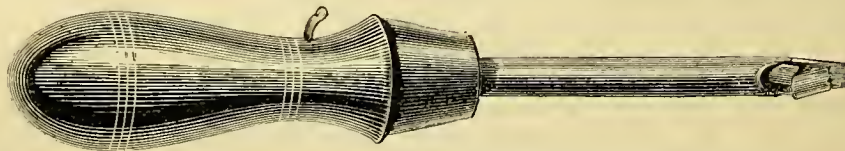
BOOTH'S SCREW-HOLDER AND DRIVER COMBINED.
